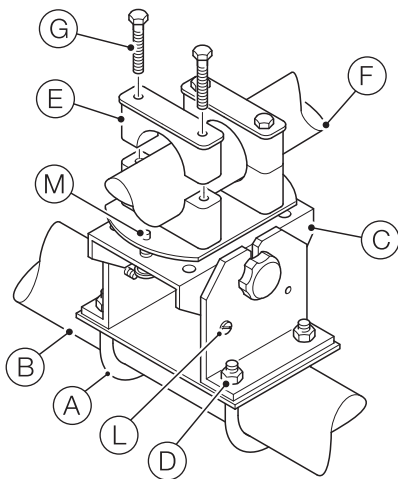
Fitting swivel / tilt bracket assembly ADS430130 and ADS430135
